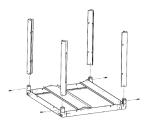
Install frame sections into frame corners. (3-ton model shown.)
